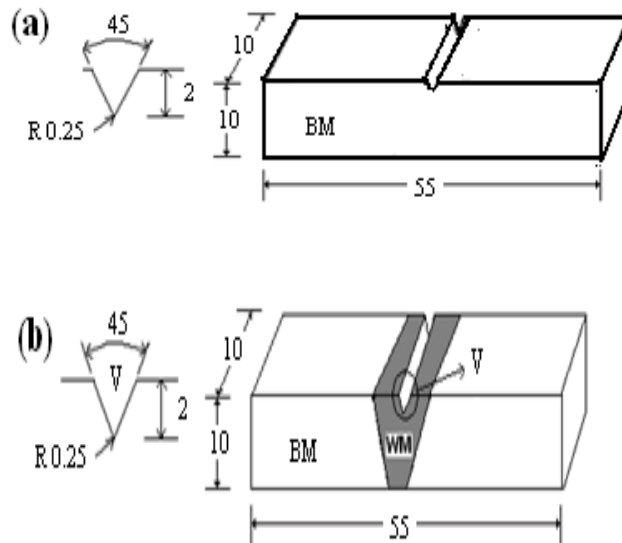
Dimensions of Charpy V- notch impact test specimen (a) base metal as well as processed specimens and (b) from weld joint (all dimensions in mm).
